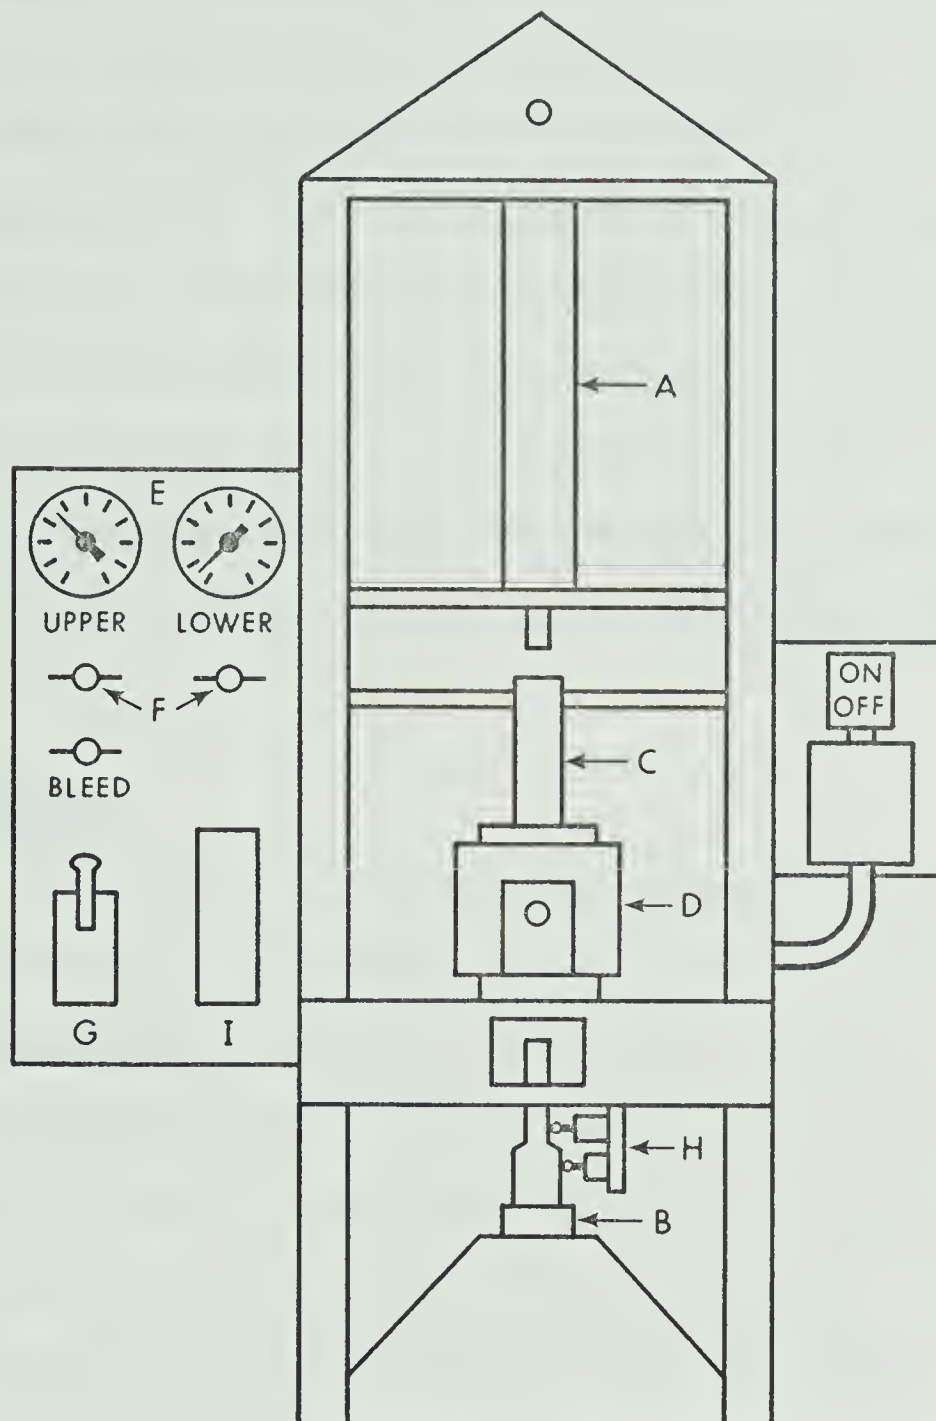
Schematic of wafering apparatus. (A) upper cylinder; (B) lower cylinder; (C) loading column; (D) extrusion die; (E) pressure gauges for upper and lower cylinder; (F) pressure control valves; (G) directional control valve for both rams; (H) microswitches which activate the directional control valve (I) to provide increased retraction speed for the lower ram at the end of extrusion.
